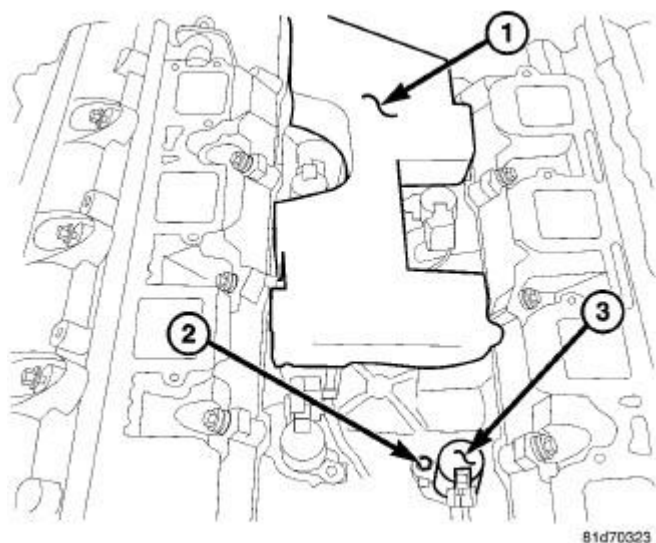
Identifying MDS Solenoid & Intake Manifold Foam Insulator Pad
